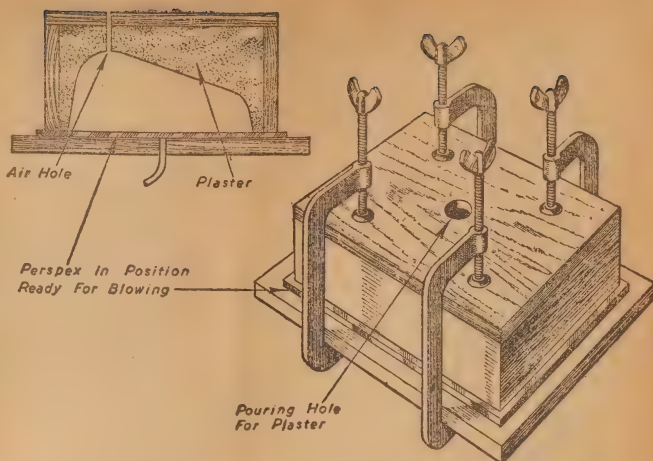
Showing mould box clamped in position on blowing board, and a section through mould box.
